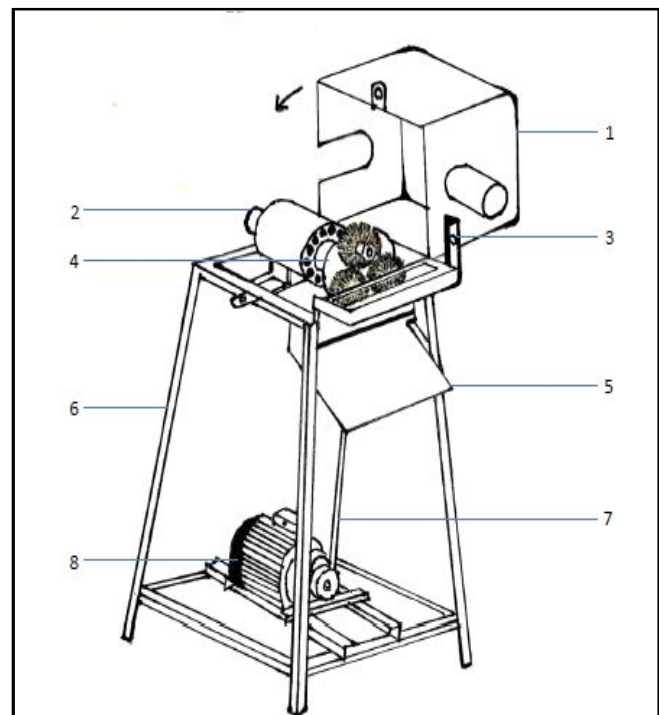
Isometric View of Sugarcane Peeler cum Cutter Machine. [1. Cover; 2. Hollow Shaft; 3. Peeling Assembly; 4. Cutting Assembly; 5. Discharge unit; 6. Main Frame; 7. V-belt; 8. DC Motor].
